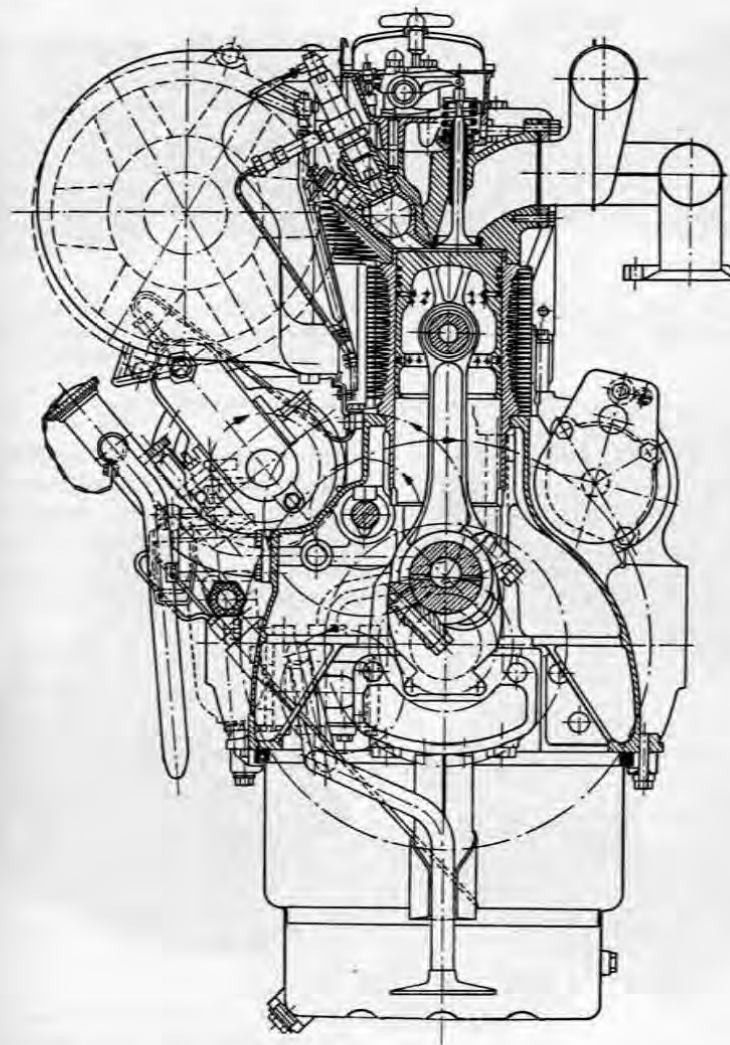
Transverse section of the Deutz F-4-L-514 engine.
